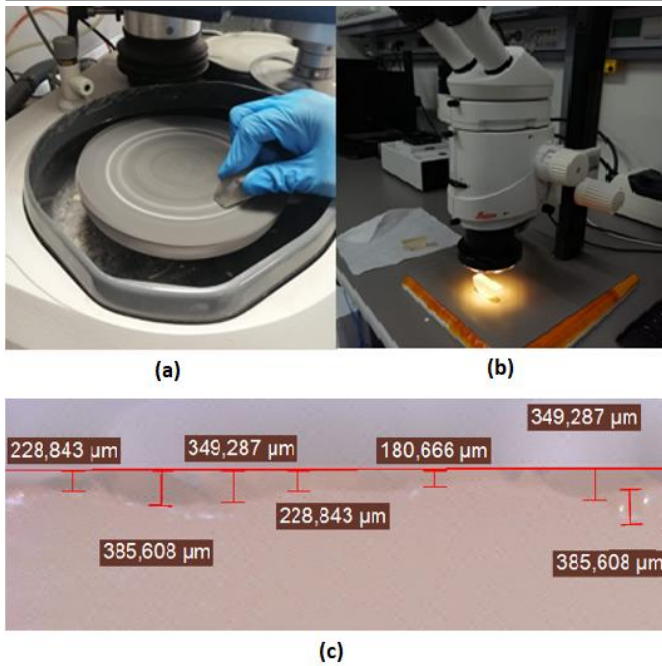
(a) Polishing Process of the Cutting Specimen (b) Inspection with Microscope (c) Parts Removed from The Surface After the Cutting Process
